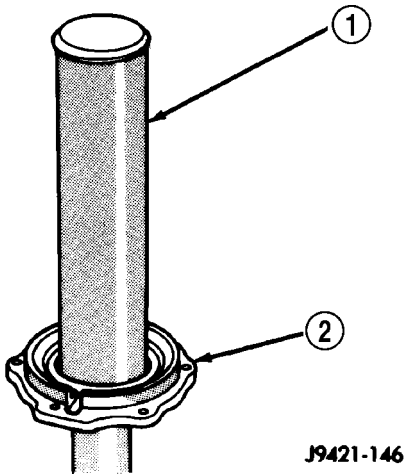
OIL SEAL IN FRONT BEARING RETAINER
